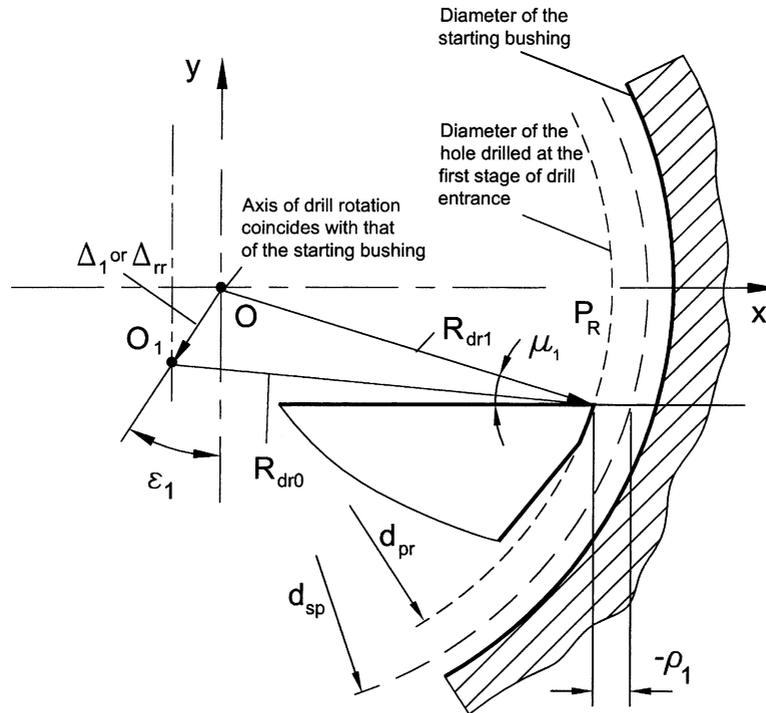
Geometrical model to calculate the diameter of the hole after the first stage of drill entrance when there is no misalignment.
